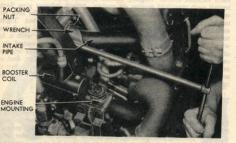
Removing Intake Pipe Packing Nut With Wrench 41-W-1537
